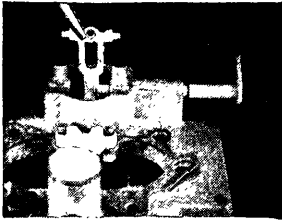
Install vacuum piston pin link and metering rod spring. Start pump counter-shaft assembly
